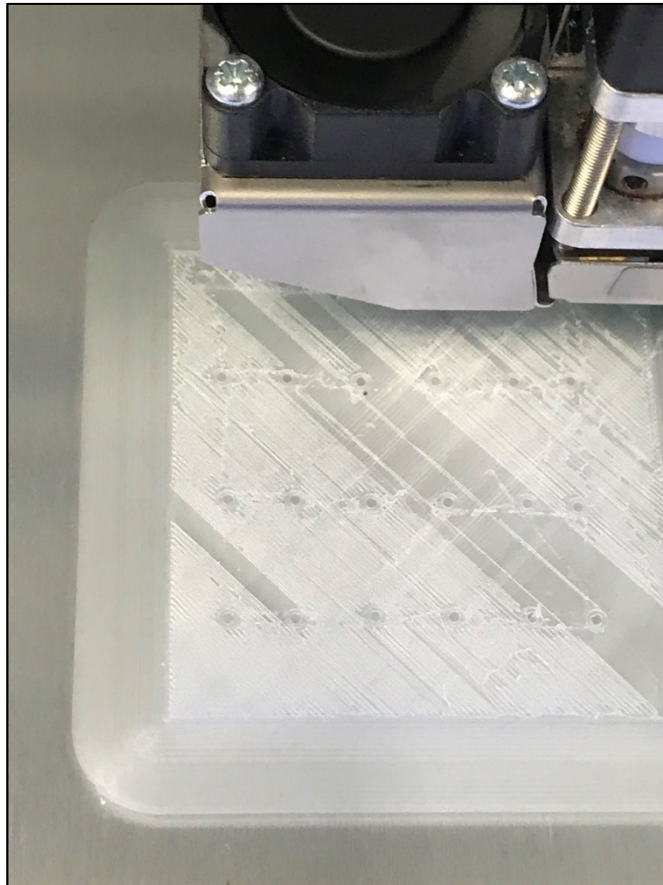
Pictorial image of 3D FDM printer printing on a PCB
